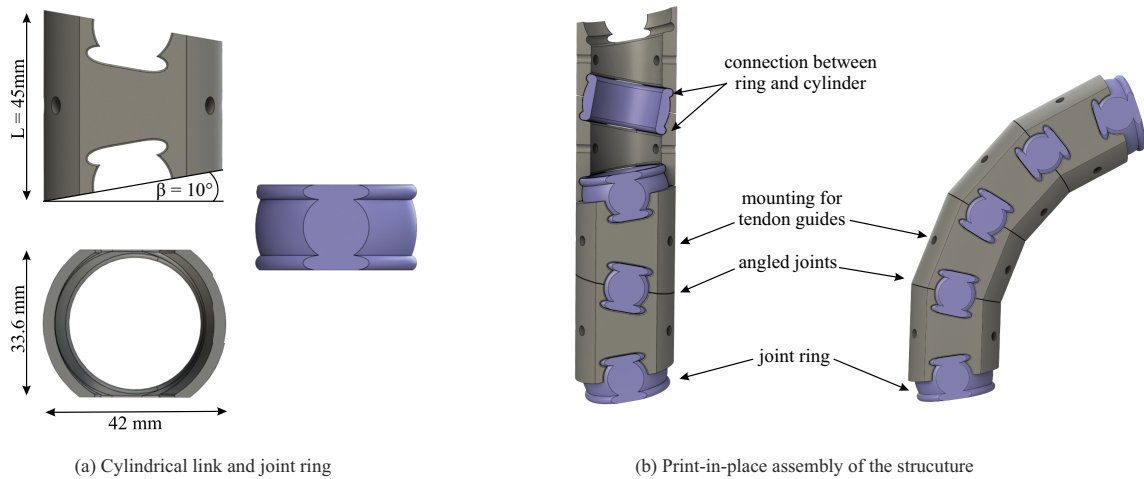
The bevelled cylinders are connected by swivel joints that allow cylinders to be rotated into a bent configuration. The design is intended to be 3D printed in a single piece (as shown on the right) using Fused Deposition Modeling (FDM). To print all the parts in place, cutouts were added to the sides of the structure. The renderings of the separate components in (a) serve solely to clarify the design of the joint rings and the cylindrical links. The values of L and β equal those chosen for the proof of concept. However, it is intended to adapt them to optimize the workspace of the whole system, as discussed in the modeling section.
